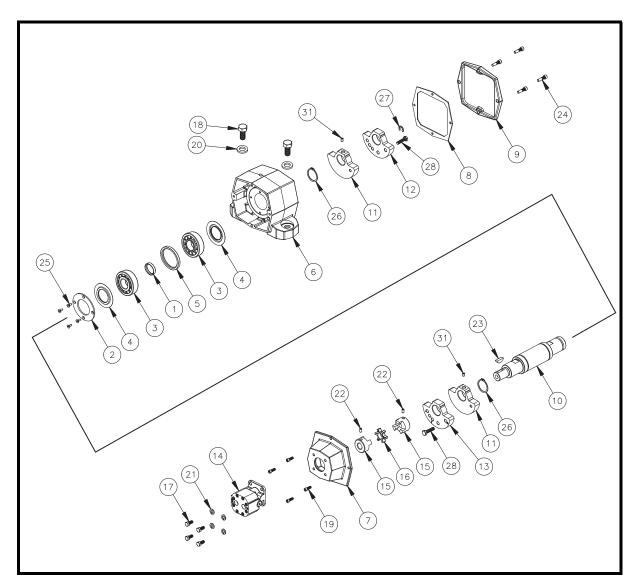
CV2.07-H Assembly, P/N 205693 (page 1 of 2)
